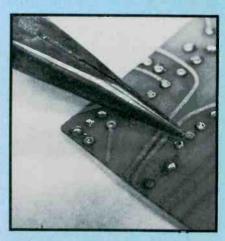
After braid or vacuum desolderers have removed all possible solder from a joint that has a component lead, but the lead remains stuck, use long-nose pliers to shake the lead in all four directions. When a soft pop is heard, the pin will be free and ready for removal.
